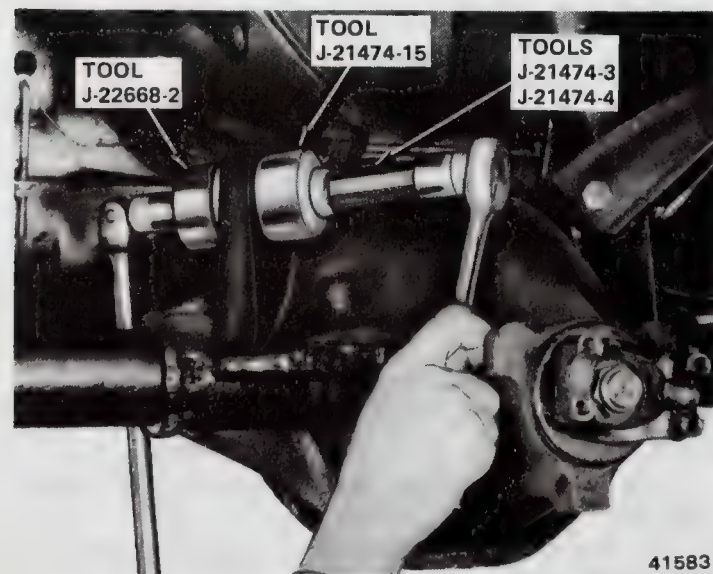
N-6 Axle Housing Upper Control Arm Bushing Installation
